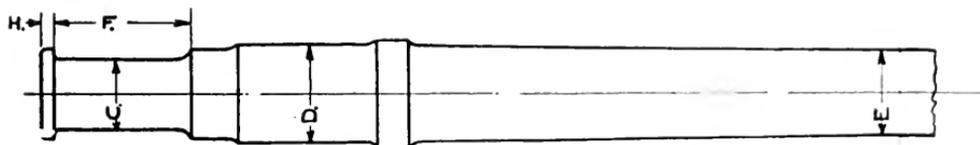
Sketch of Axle, showing Limits of Wear Within which Repair by Electric Welding is Feasible
